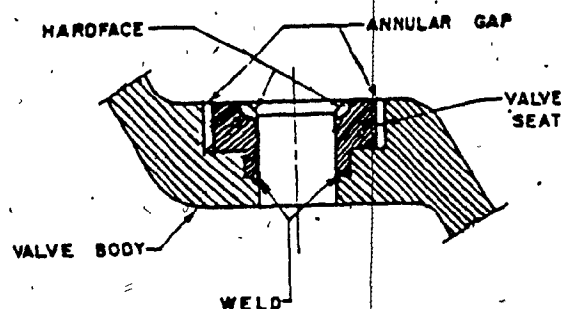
Design for Shoulder in Valves With Welded Seats.
